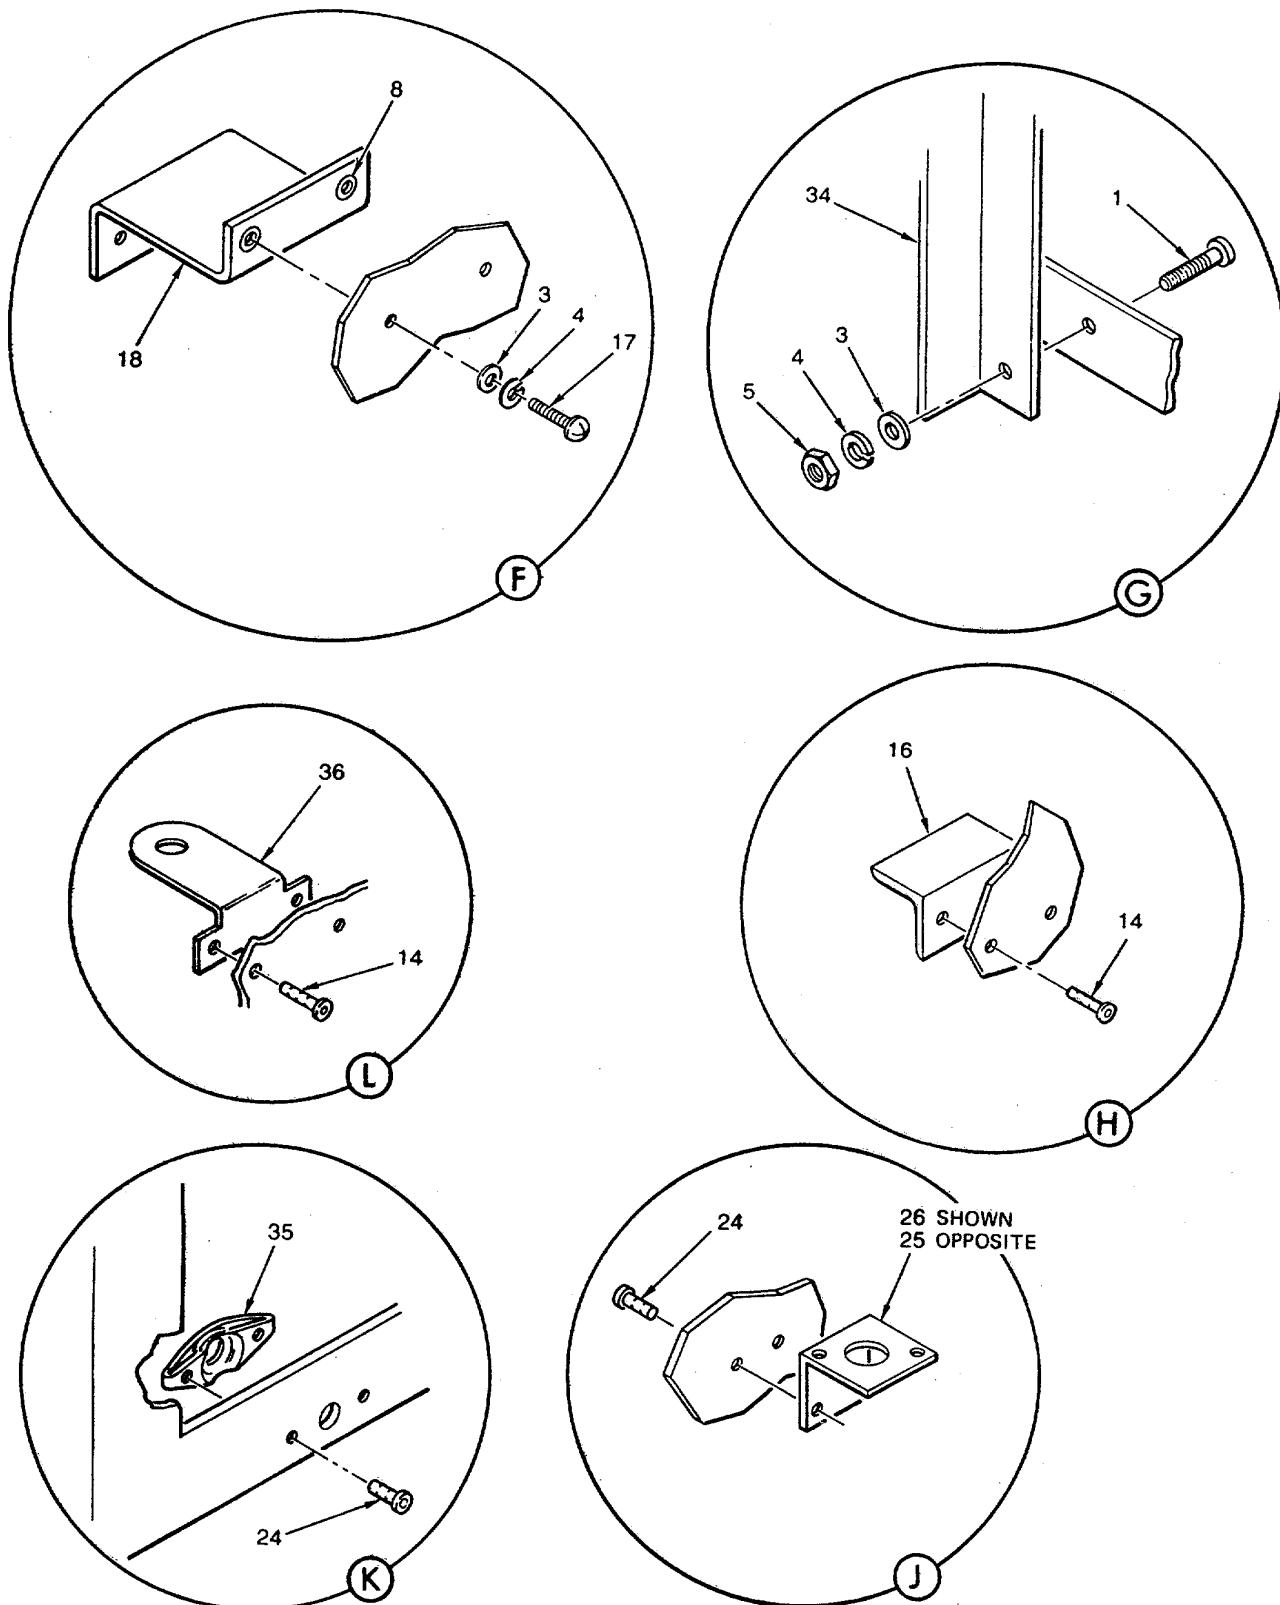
Chassis (Lower) (Sheet 2 of 2)
